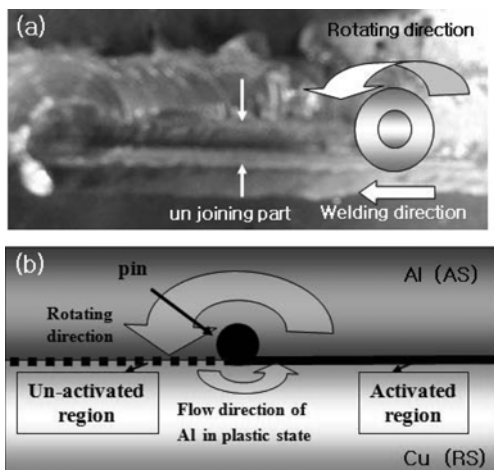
(a) Appearances of bead, (b) Schematic of material flow at counterclockwise rotating of pin.
